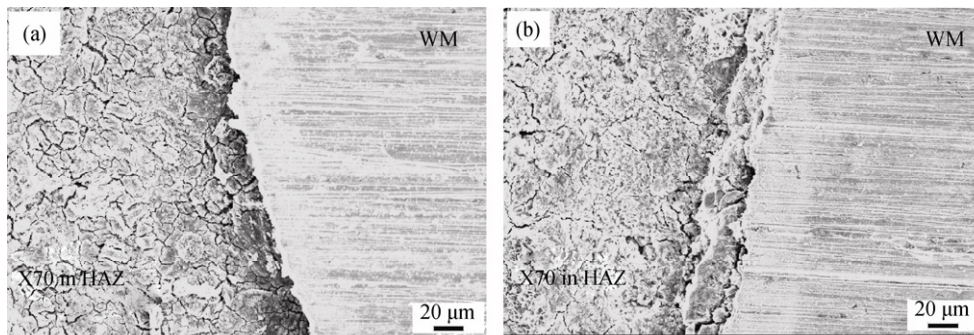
Microscopic morphology of the weld metal after immersion for 30 d in artificial deepwater at 4°C: (a) MIG; (b) TIG.
